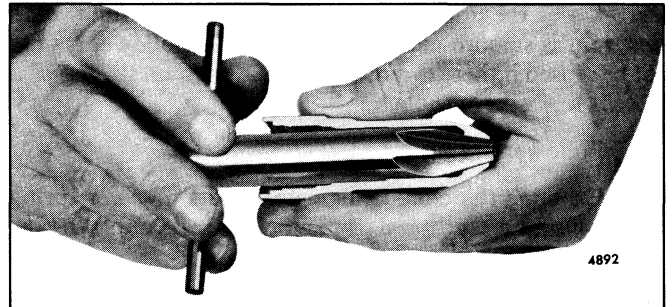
Cleaning Injector Nut Lower End with Tool J 22096-2
